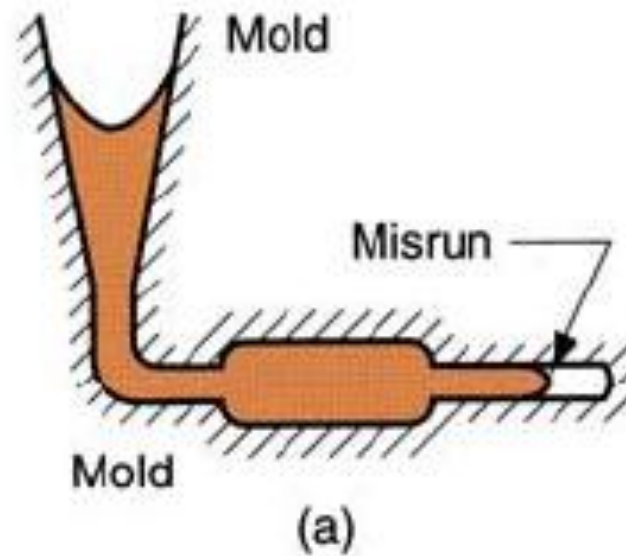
Some common defects in castings: (a) misrun
